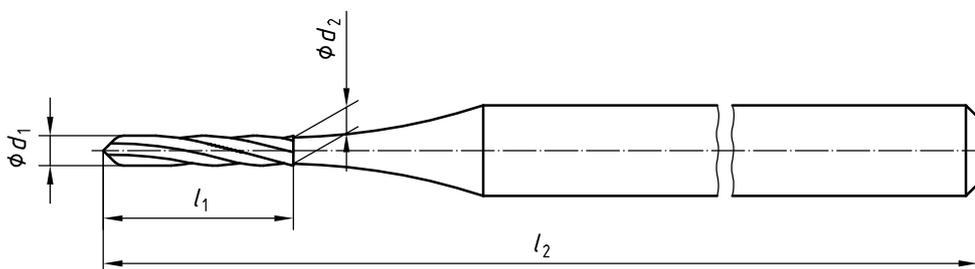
Torpedo, cylindrical, head length 5 mm, carbide finishing burs
